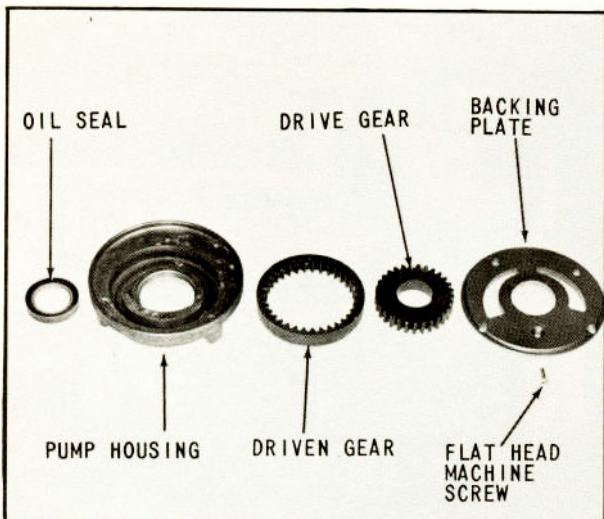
Front Pump Parts with Backing Plate, Assembly 71-1A60
